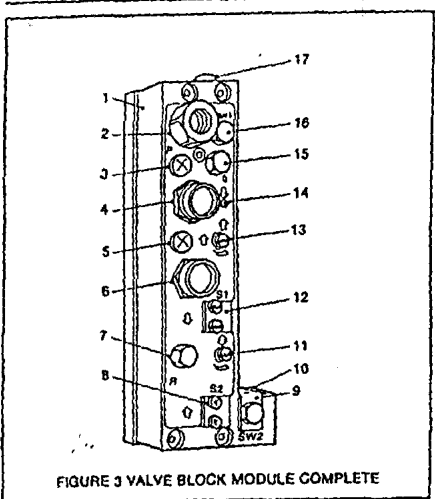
VALVE BLOCK MODULE COMPLETE
